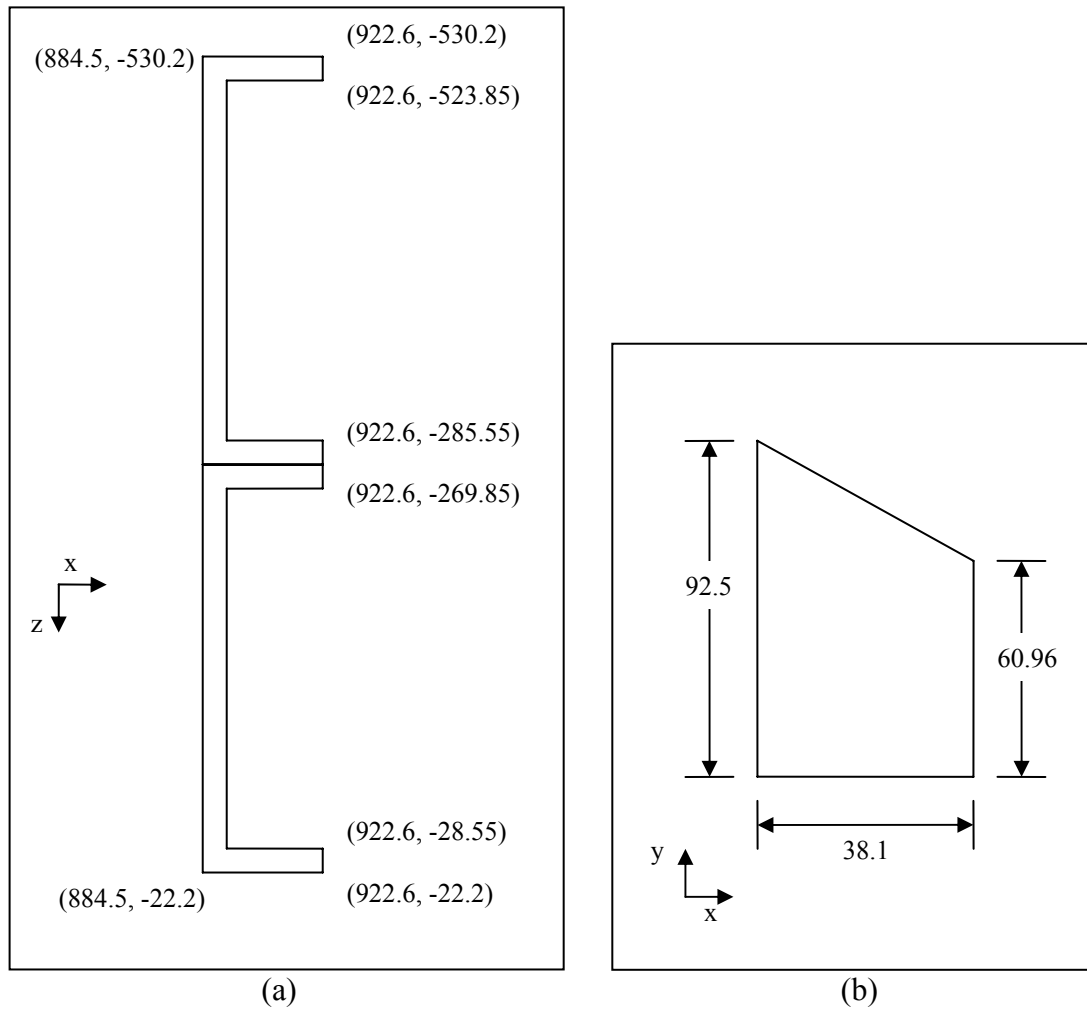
Layout of 254×76.2×6.35 mm Tubes (units of mm), showing (a) coordinates {top view} and (b) dimensions {front view}
